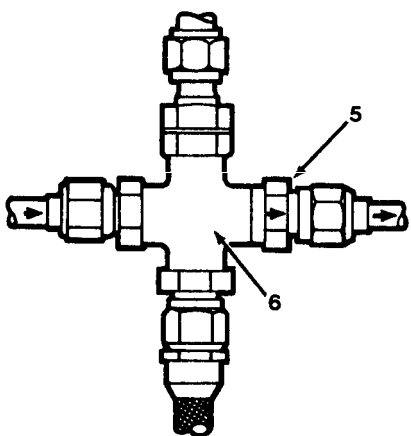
Hydraulic System - Armament (Sheet 1 of 2)
